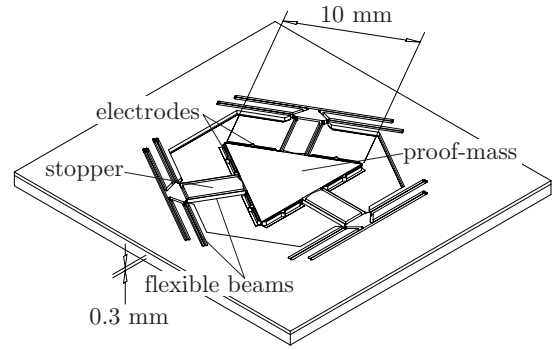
CAD model of a micromachined compliant realization of the 2D-3III mechanism
